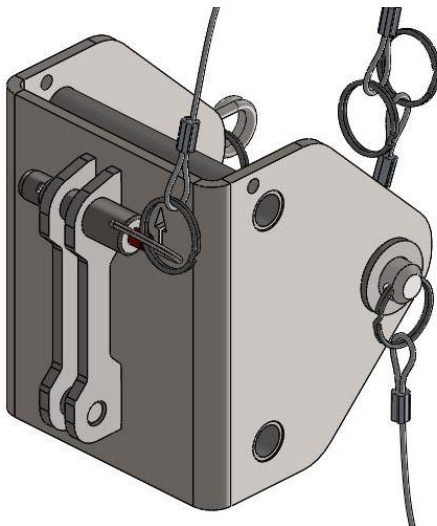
Universal holder for rescue lifting devices PSD100-131-000.
